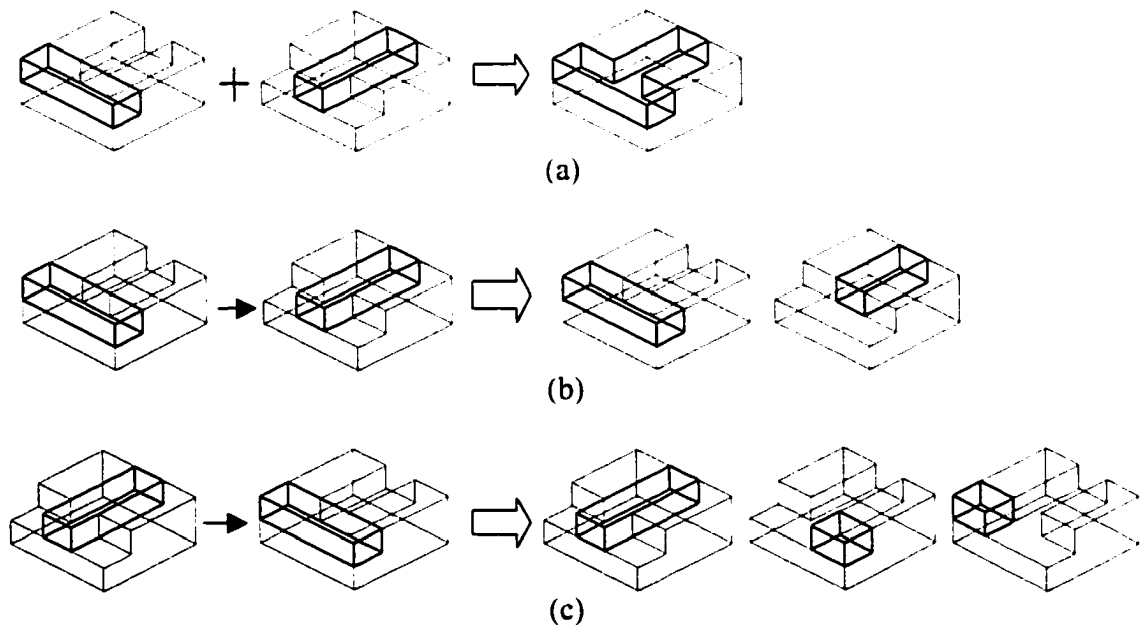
(a) Merging FTR2 and FTR4 results in FTR1; (b) machining FTR2 first and then FTR4 results in FTR2 and FTR3; (c) machining FTR4 first and then FTR2 results in FTR4, FTR5, and FTR6.
